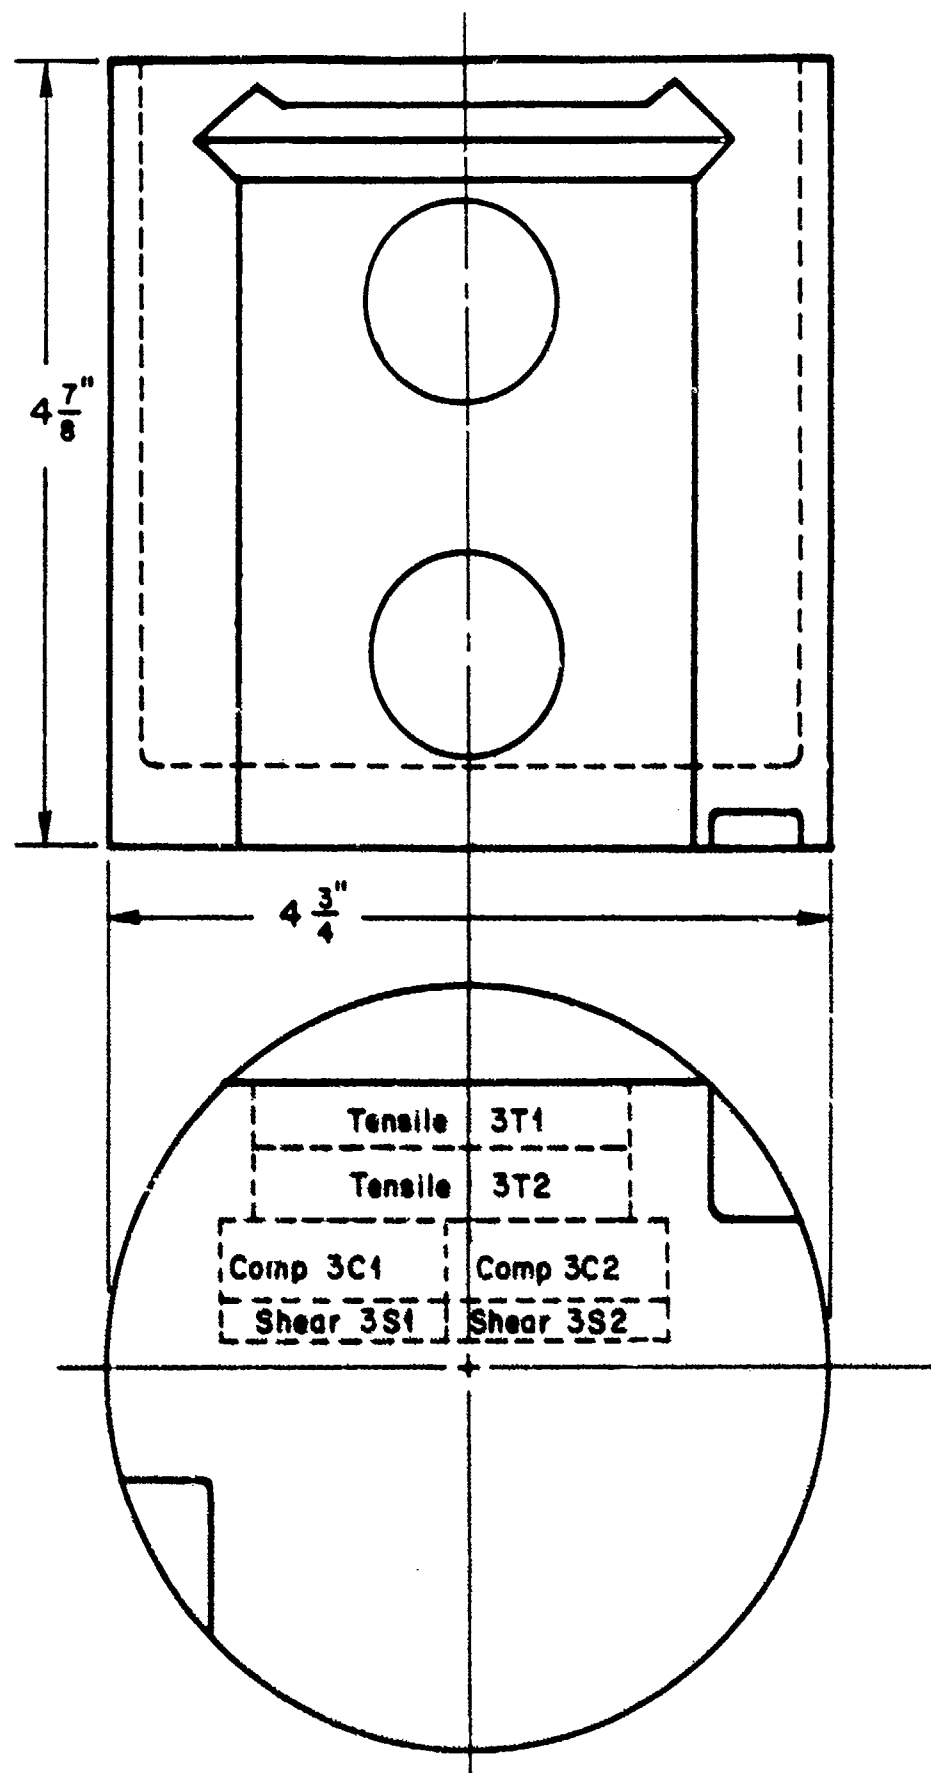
Location of test specimens for 15-5PH (H925) cylinder casting.
